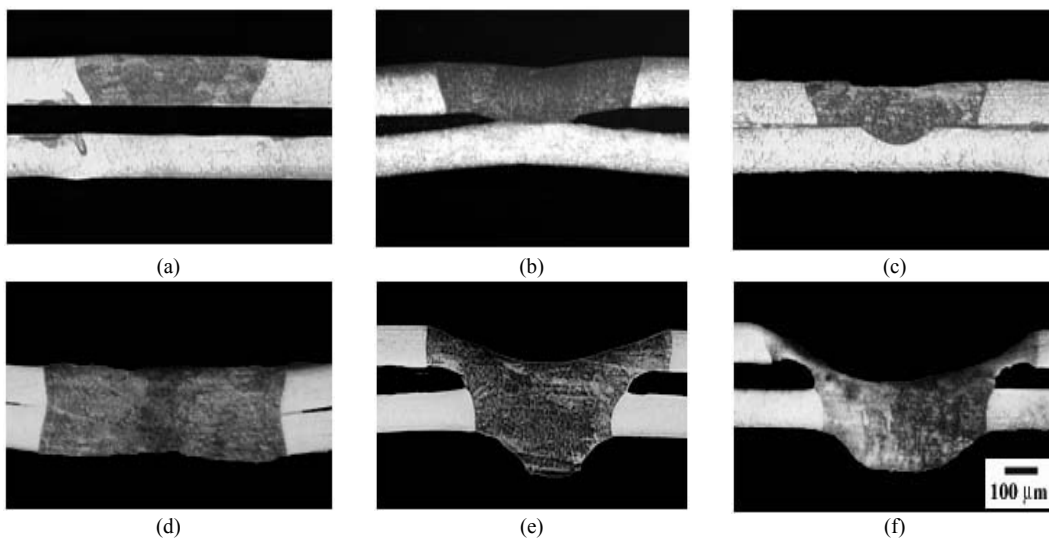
Cross sections of Hastelloy C-276 lap joints made with pulsed Nd:YAG laser welding with different pulse energies (E_p): (a) 1.0 J; (b) 1.25 J; (c) 1.50 J; (d) 1.75 J; (e) 2.0 J; (f) 2.25 J; All figures have the same magnification as shown in (f)
